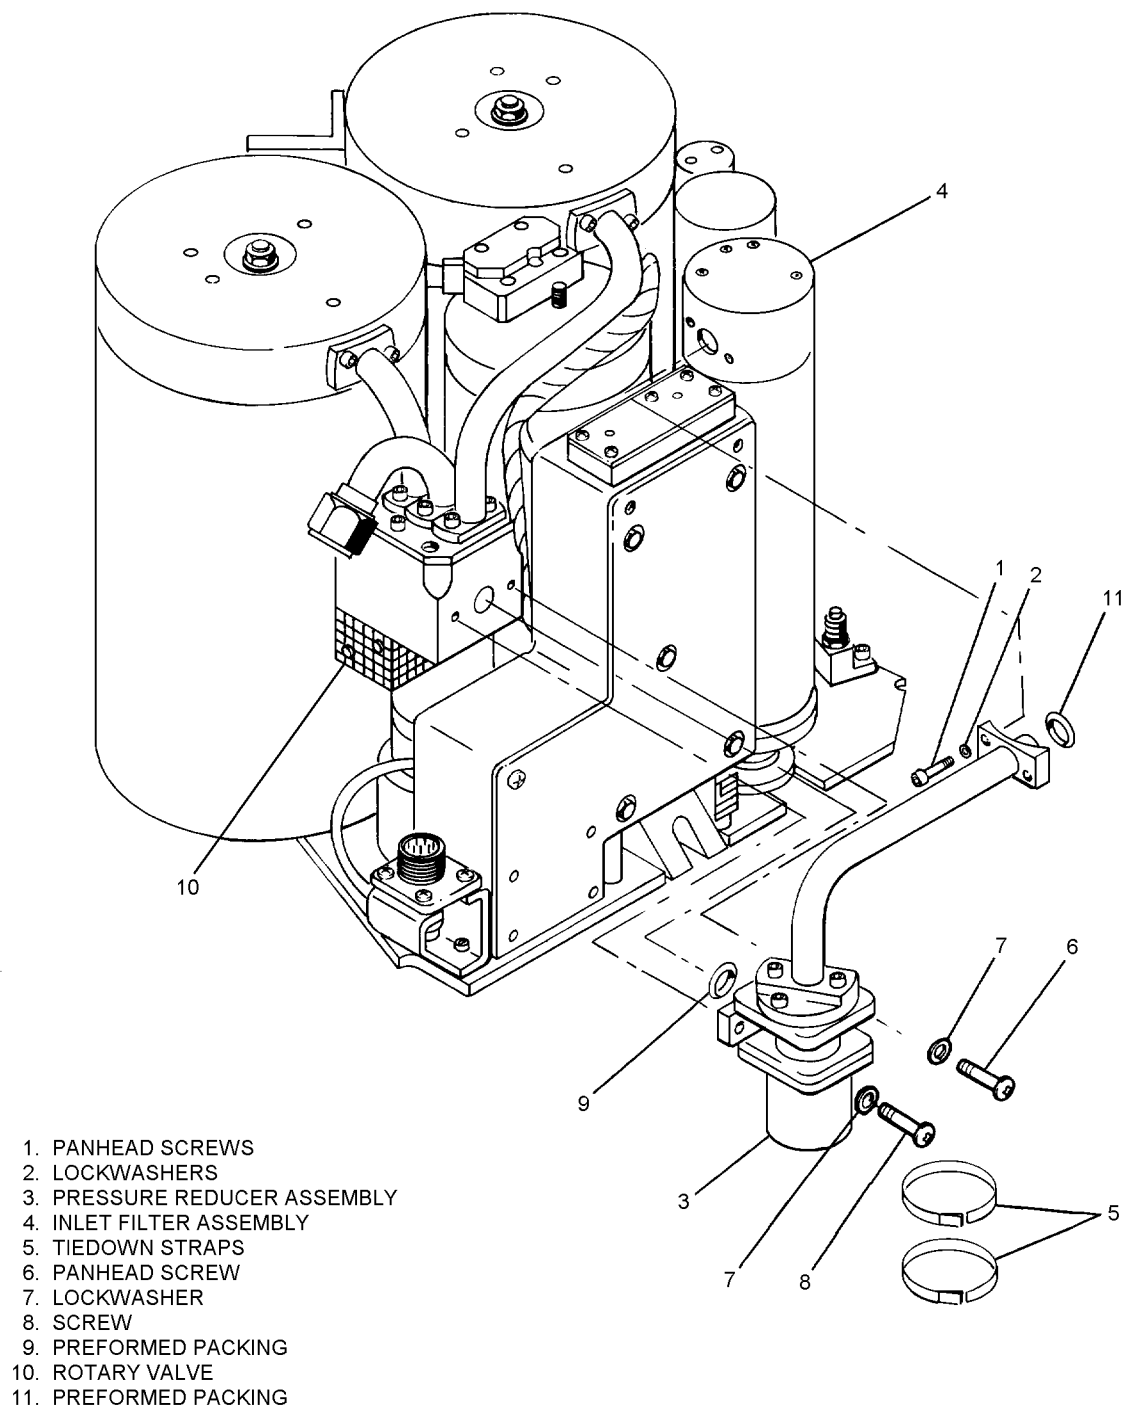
Pressure Reducer Assembly Removal/Assembly
